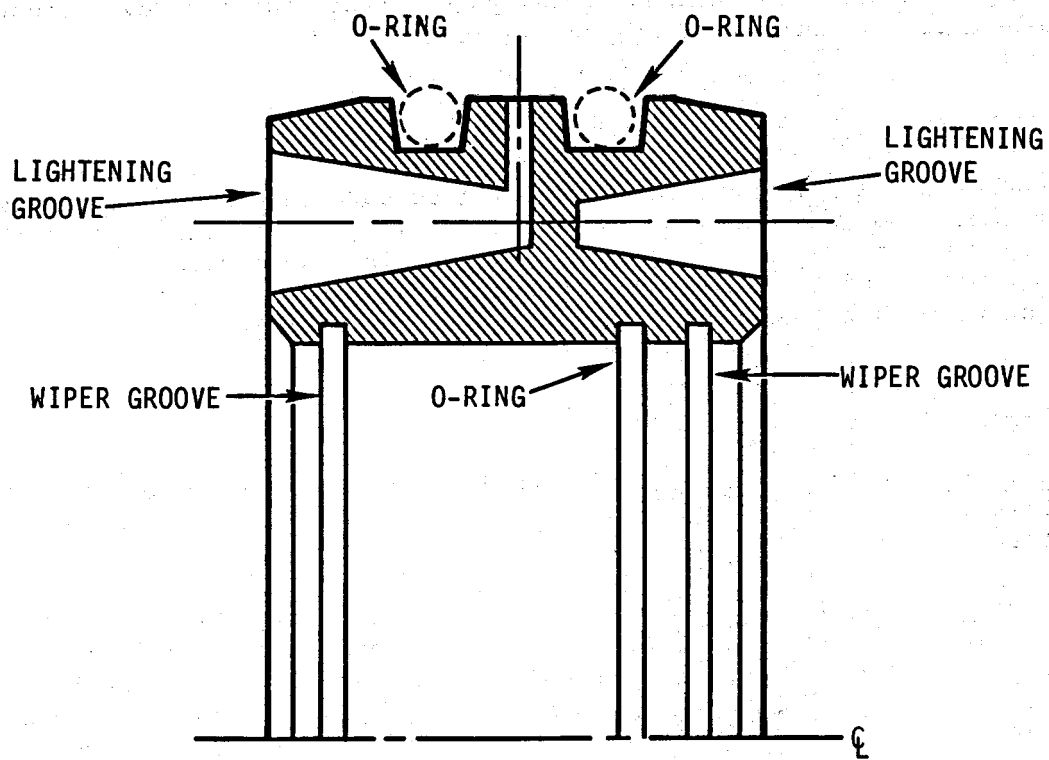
Single-Piece Piston Using All-Elastomer Seals
